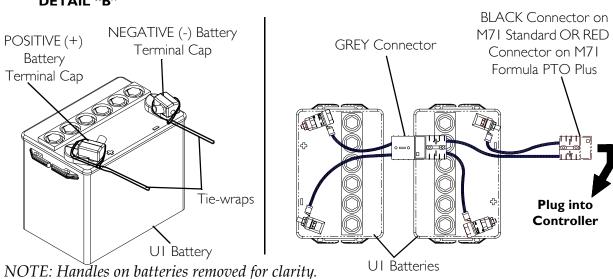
Connecting/Disconnecting Battery Cables
